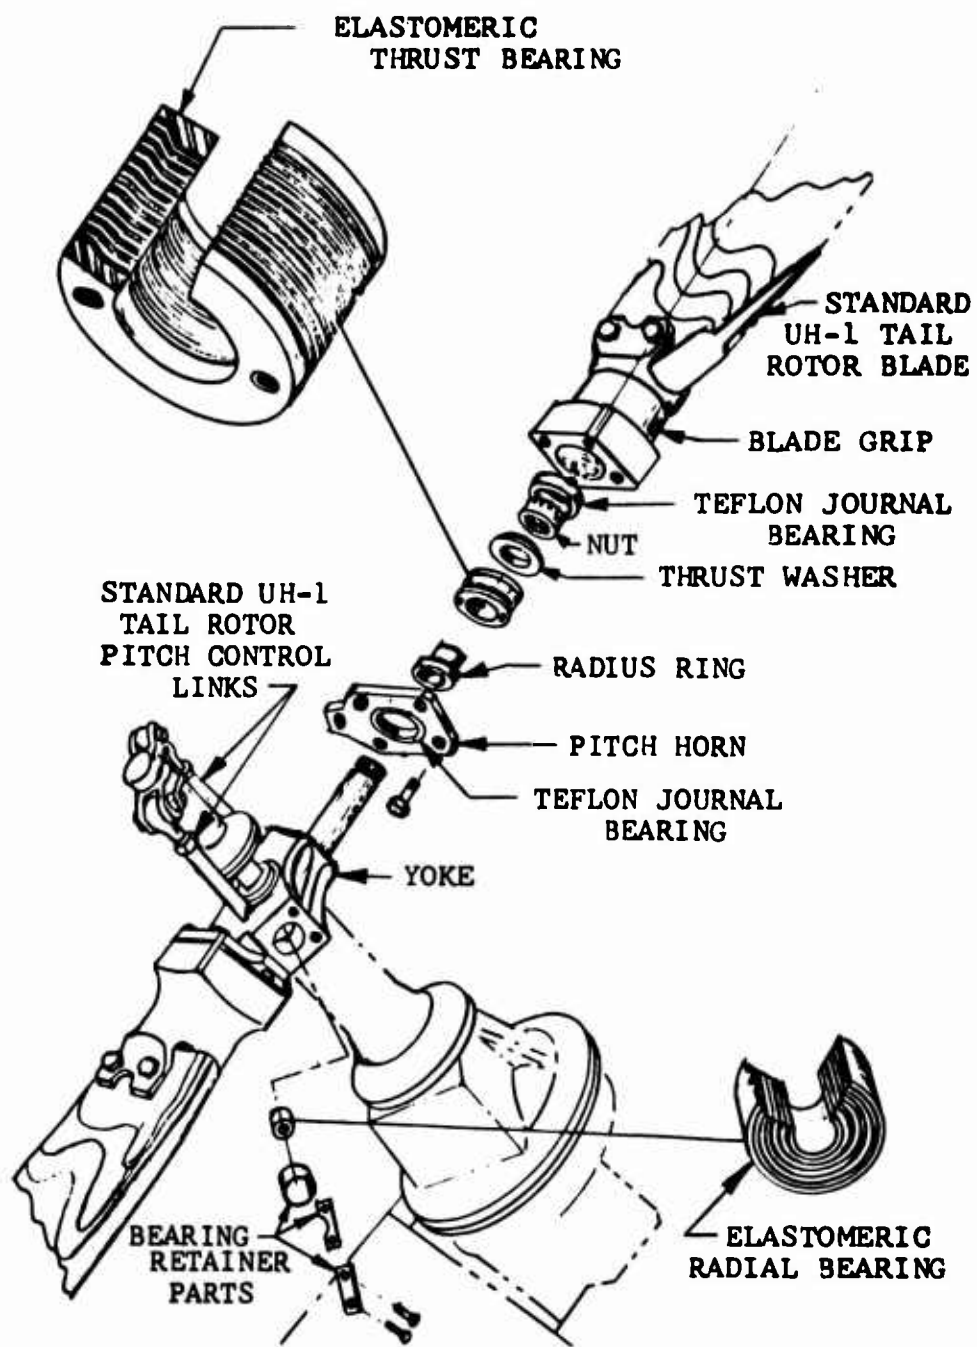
ELASTOMERIC BEARING TAIL ROTOR CONFIGURATION 2.
